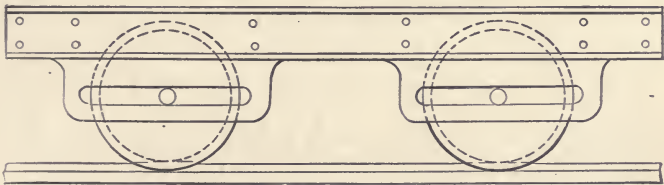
CORE OVEN CARS. (STRAIGHT LINE ENGINE CO.)
